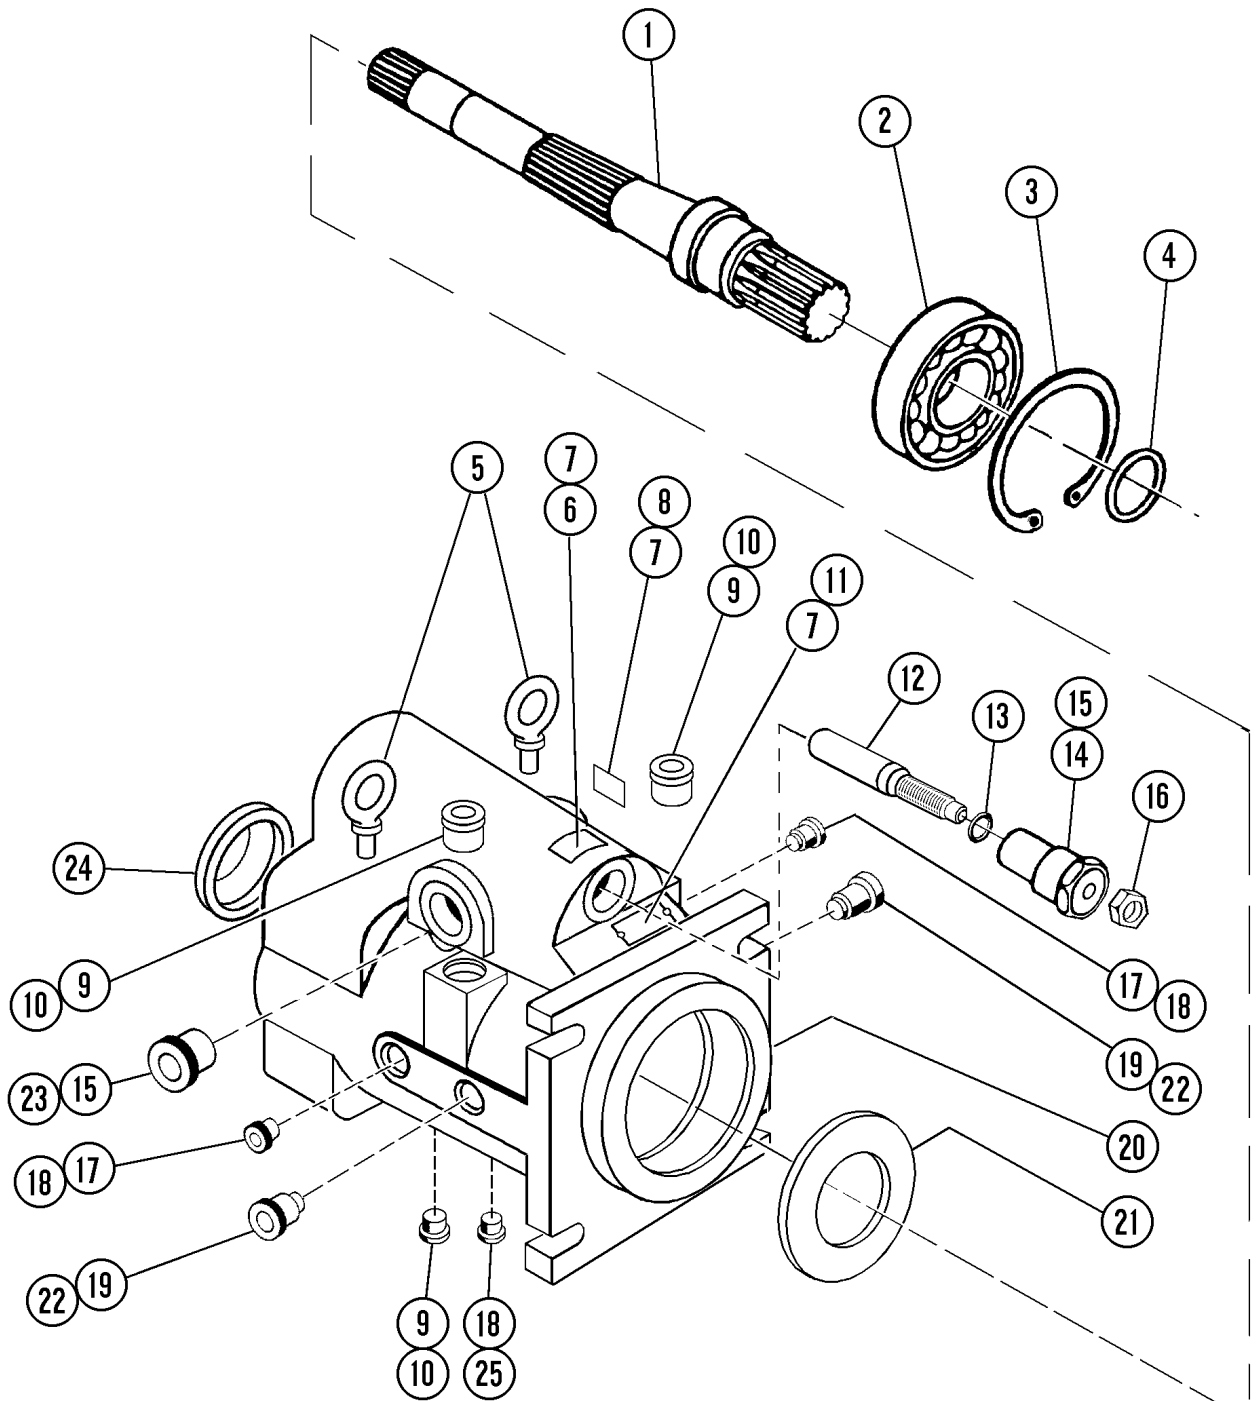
SPOOL AND SLEEVE ASSEMBLY
